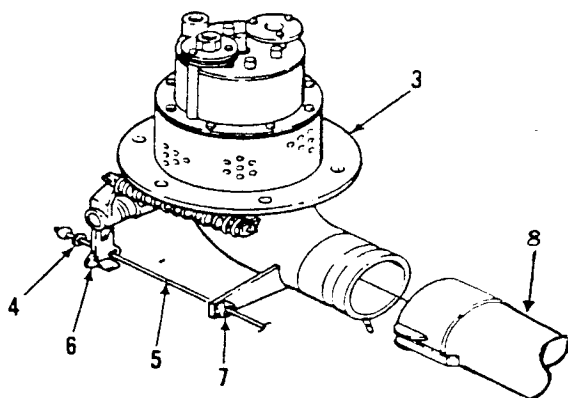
Tank, Bottom Loading Valve Cable Connection.
